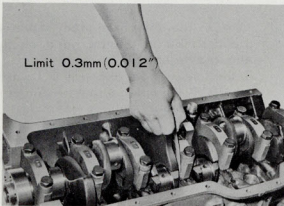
Measuring Crankshaft Thrust Clearance W9115
